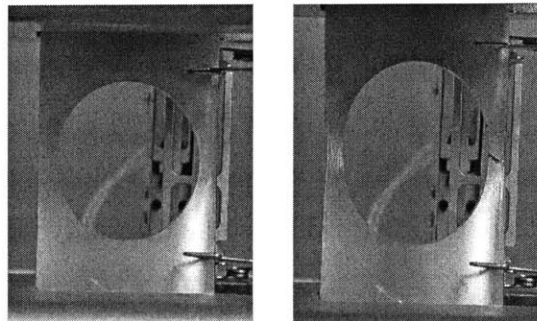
Initial and final deformed shapes of tensile tests on a plate with a circular hole under tensile loading
